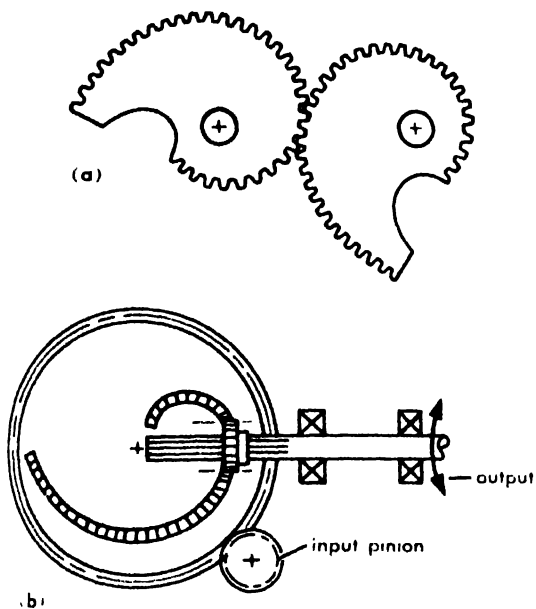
Function gears. (a) Radial. (b) Spiral-face function gear.
